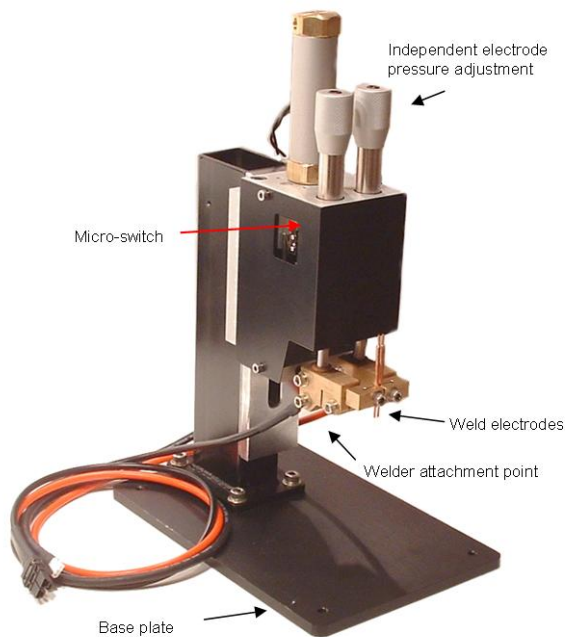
The SEK500B parallel gap weld head. Foot pedal actuated.
